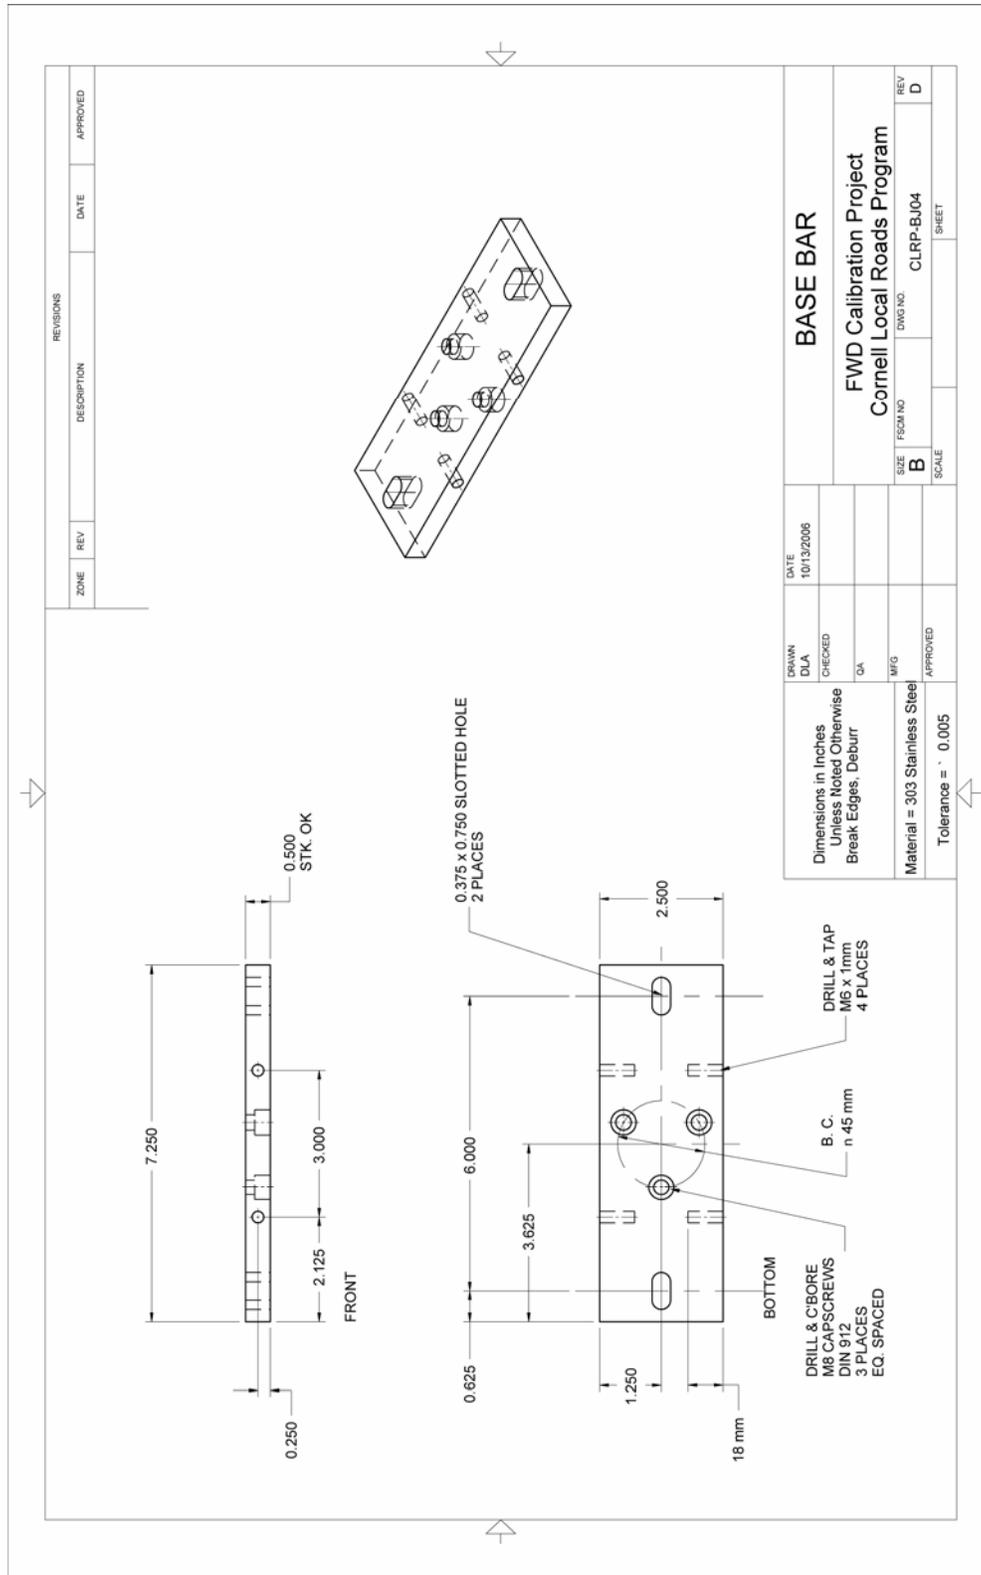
Drawing. CLRP-BJ04 Base Bar.
